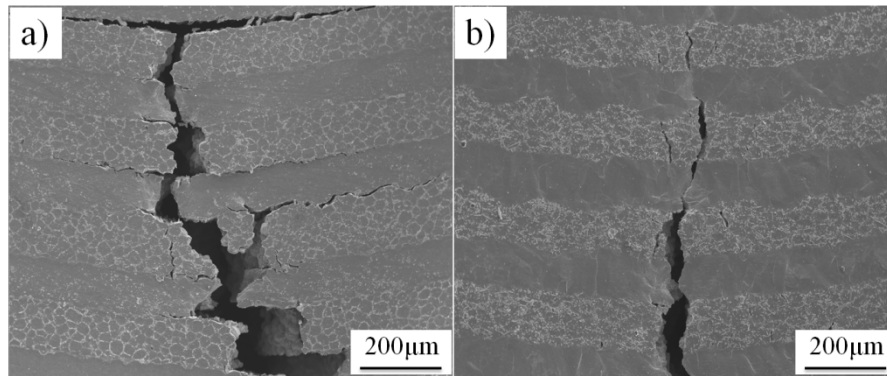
Bending fractographs of laminated Ti-(TiBw/Ti) composites fabricated at different diffusion welding temperature. a) 1000°C; b) 1200°C.
